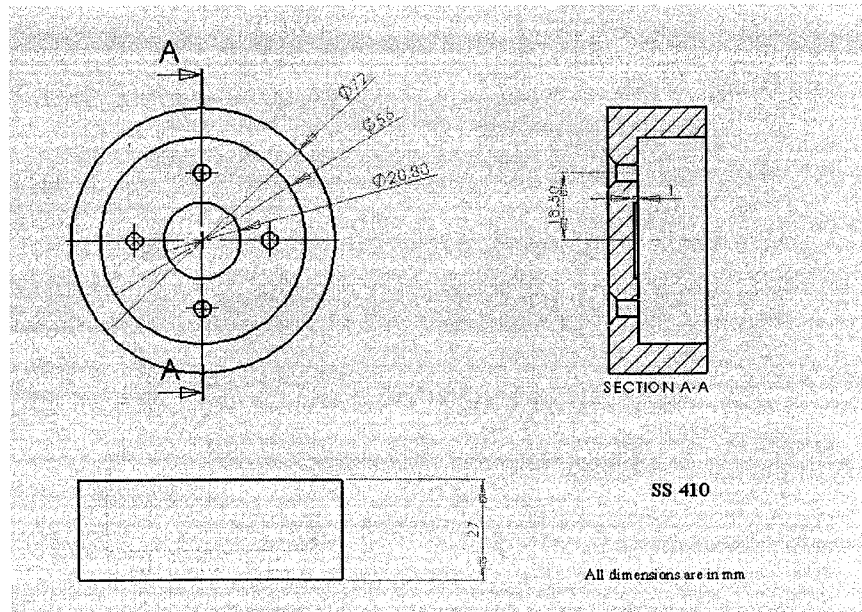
1 Mechanical drawings of the SS-410 stainless steel cylinder.
